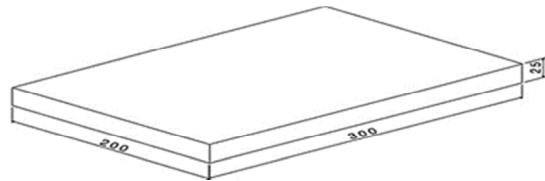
Dimensions of Work material En-31 tool steel (all dimensions in mm)
